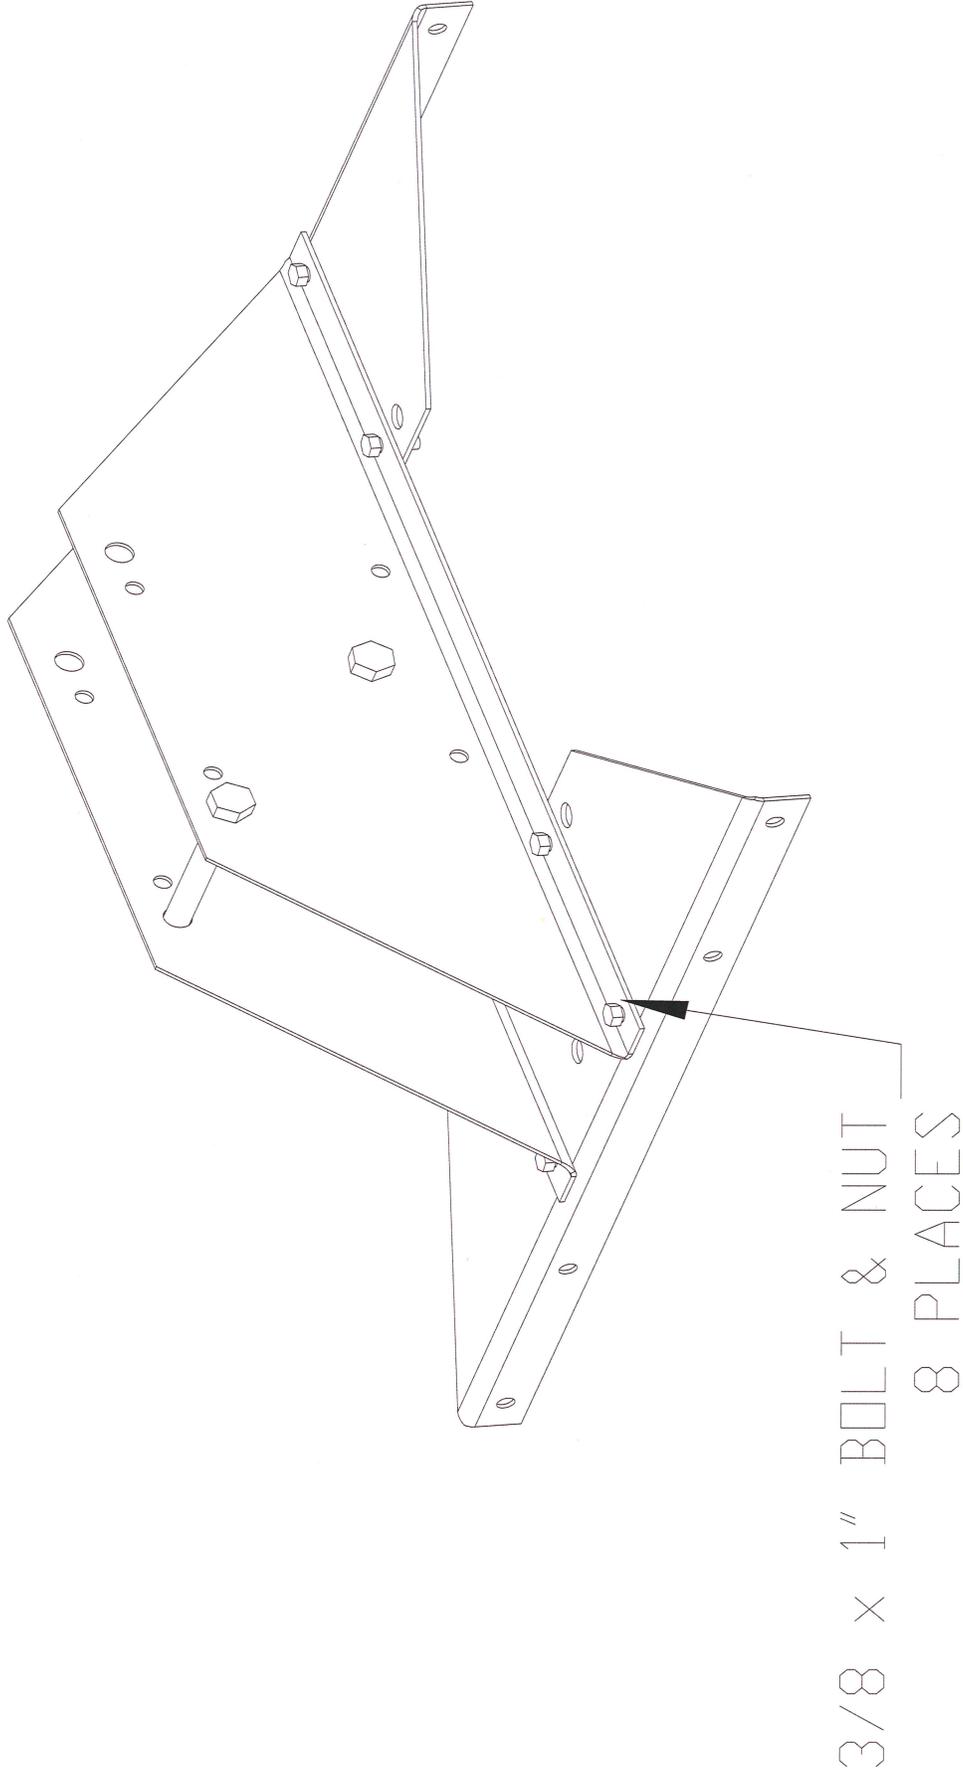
TallTower Base Plate Assembly (for 4.5 inch dia. towers)
